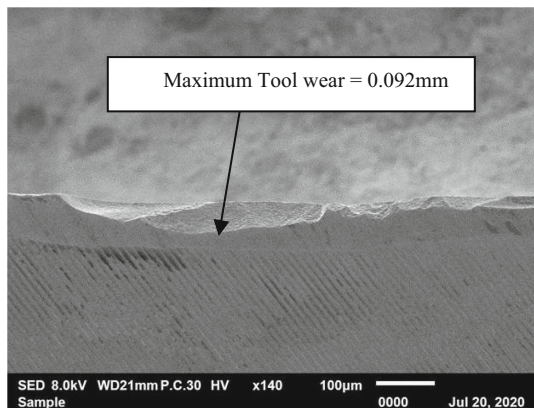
SEM image of end mill tool having 20 μm CER cutting tool and milling with 1.2 width of cut after 4400 mm distance travelled.
